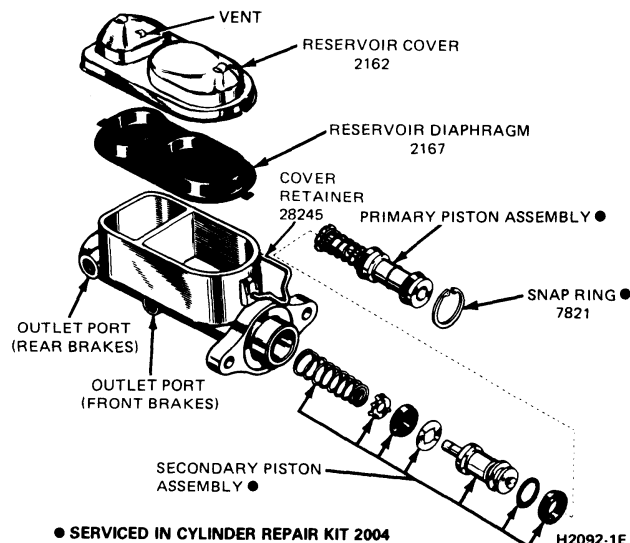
Dual Master Cylinder Disassembled—F-100—F-350 E-100—E-350, Bronco
